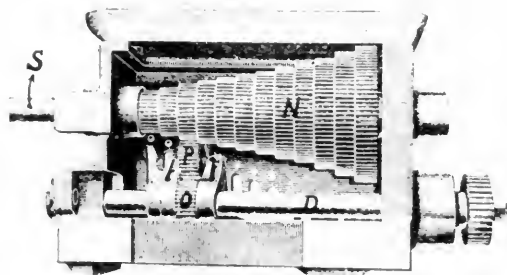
REAR VIEW OF GEAR BOX, SHOWING GEARING.
